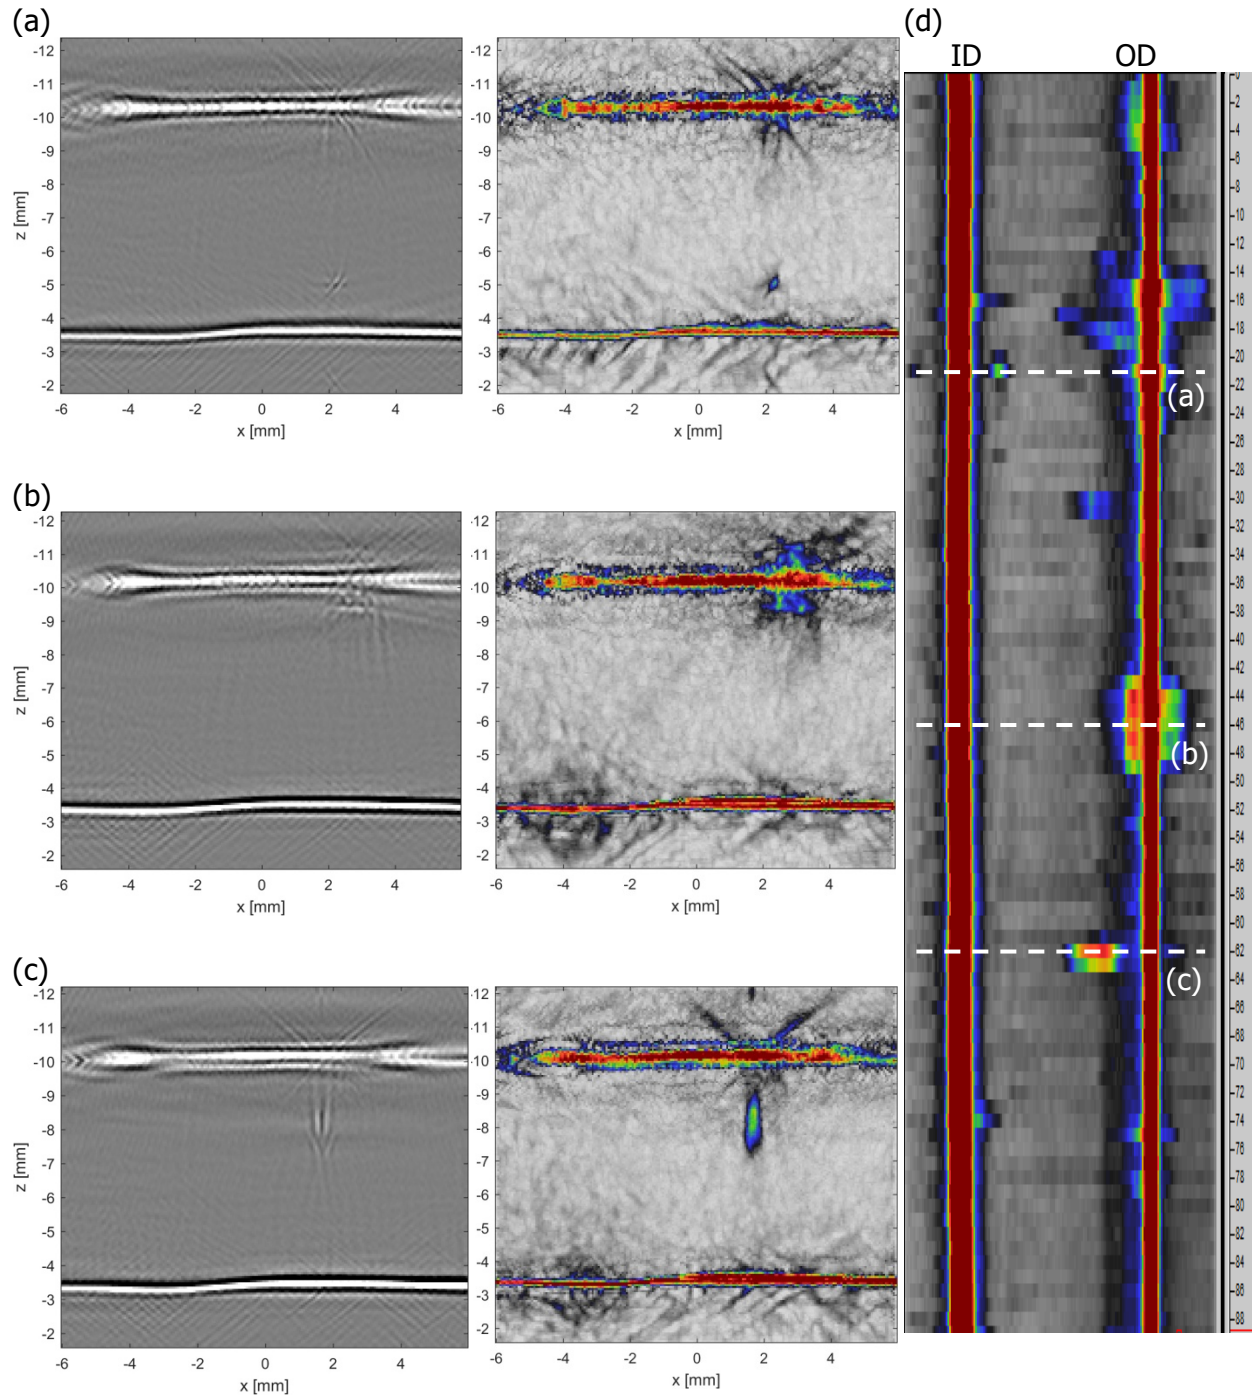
A 16" sample containing several flaws at different axial positions: shallow OD defect and small inclusion near the ID at the bond line (a), OD surface defect (b), cold weld without connection to the OD surface (c). Both unrectified (gray scale) and rectified (color) images are presented. The side view (d) with the ID on the left side and the OD on the right side provides an overview of the scanned section.
